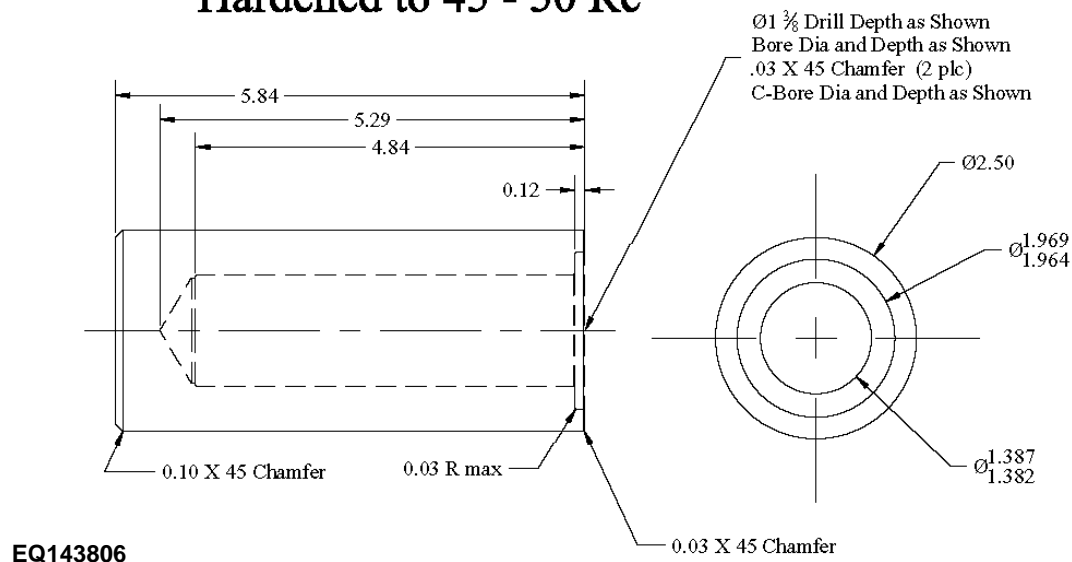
SLINGER/CARRIER DRIVER
